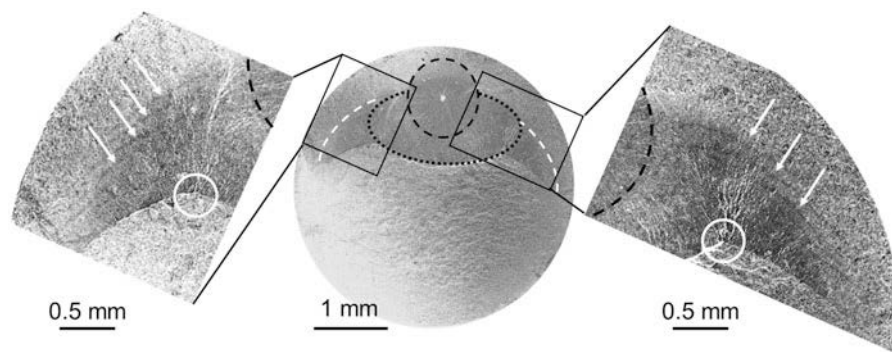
Detailed view on the fracture surface of the specimen discussed in Fig. 5. Central part: Overview of the fracture surface with indicated fisheye fracture, region of faster crack growth toward the core material, and final crack growth toward the specimen surface. Left and right parts: Enlarged views of areas marked on overview image with indicated beach marks (white bold arrows) and the interface between the stable crack growth within the fisheye and faster crack growth toward the core material (black dotted line) and triangulation points (white circles), which mark the points of highest crack resistance.
